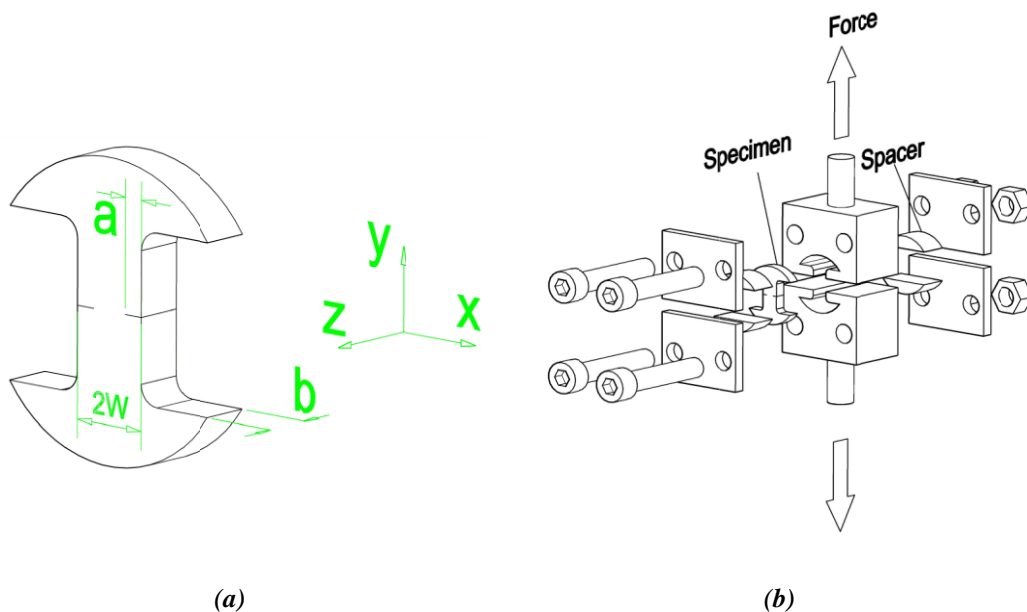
Test specimen (a) the fixture connecting the sample to the loading frame (b) single edge notch tension specimen
